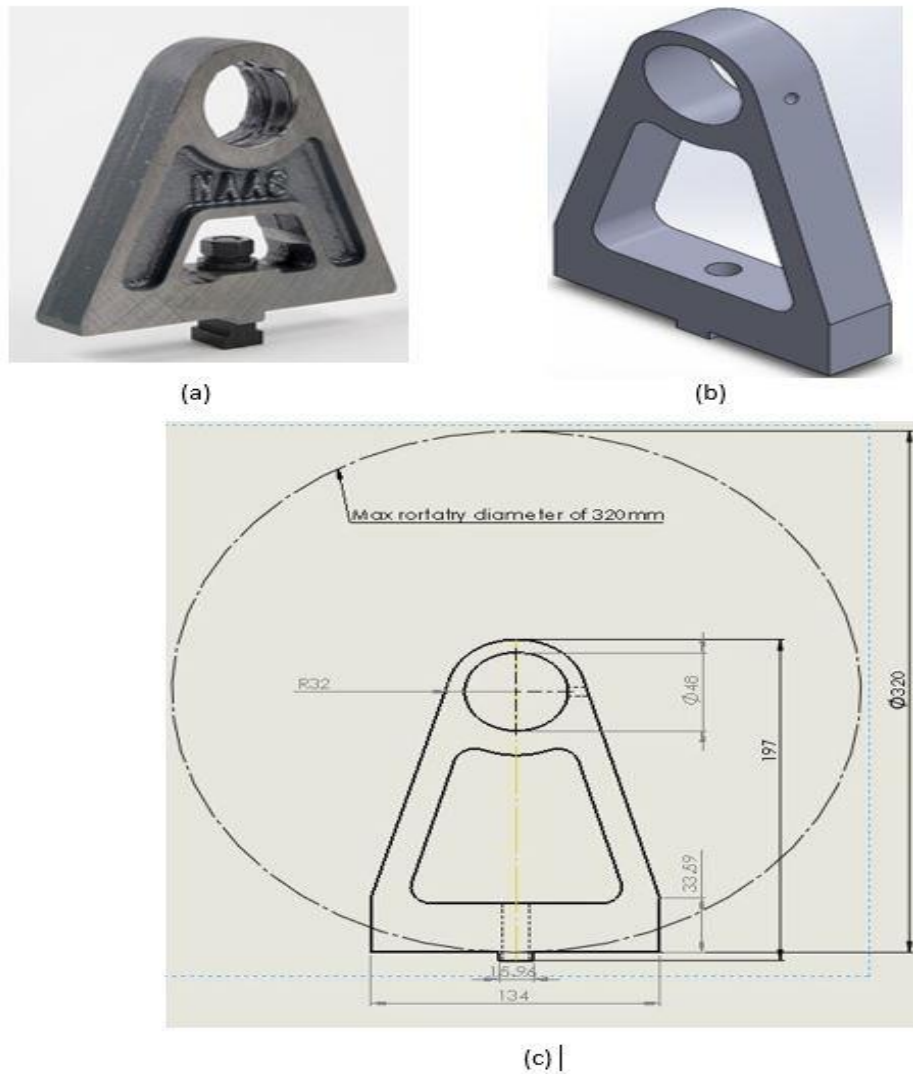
(a) A support structure from HAAS, Inc [16] (b) 3D CAD model of the A-Pillar (C) Sketch representing the Maximum rotary diameter 320 mm for the designed A-Pillar.
